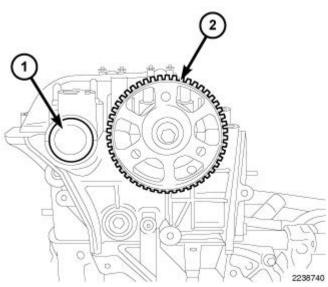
Camshaft Sprocket Courtesy of CHRYSLER LLC
